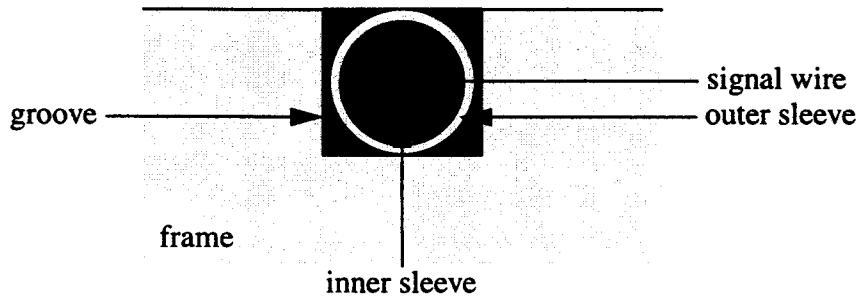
A cross-sectional view of a single wire fixture (not to scale). The outer sleeve is permanently attached with epoxy within the milled rectangular channel. The inner sleeve is attached to the wire using an air-driven crimping tool. The seal between the two sleeves is not gas-tight.
